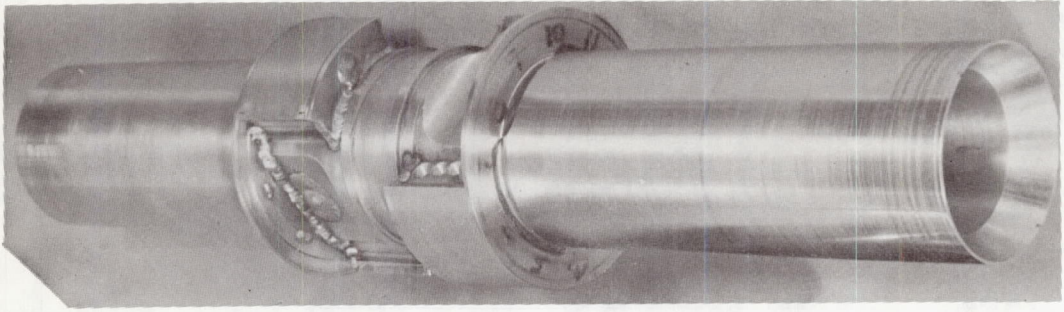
View of Simulator Rotor Prior to Final Machining
